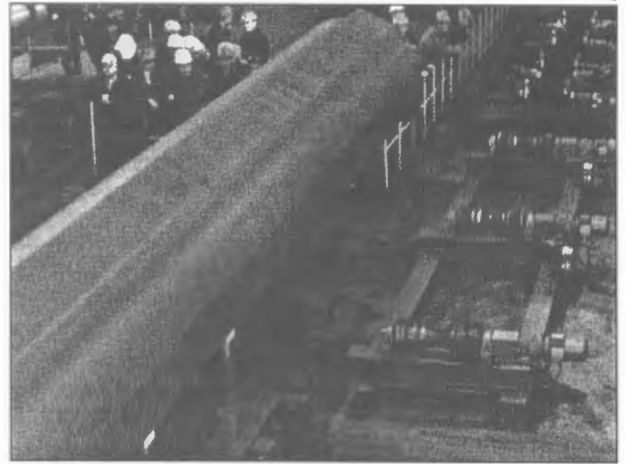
Line for single-seam welding of large-diameter pipes
